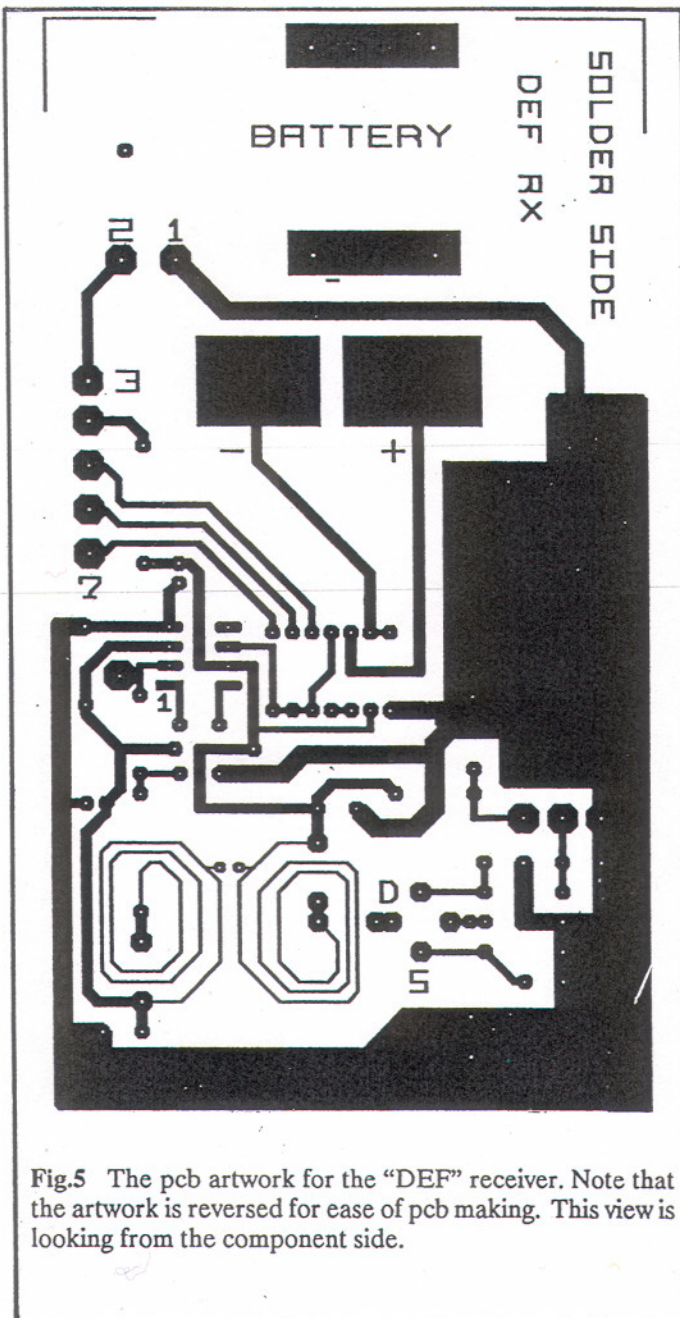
The pcb artwork for the "DEF" receiver. Note that the artwork is reversed for ease of pcb making. This view is looking from the component side.
